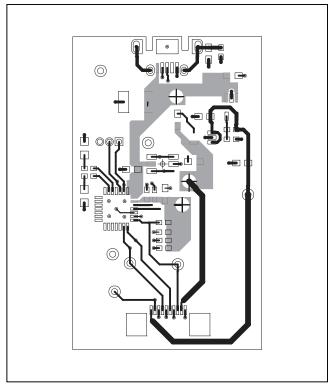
USBOSMB Mother Board PCB Layout—Component Side
